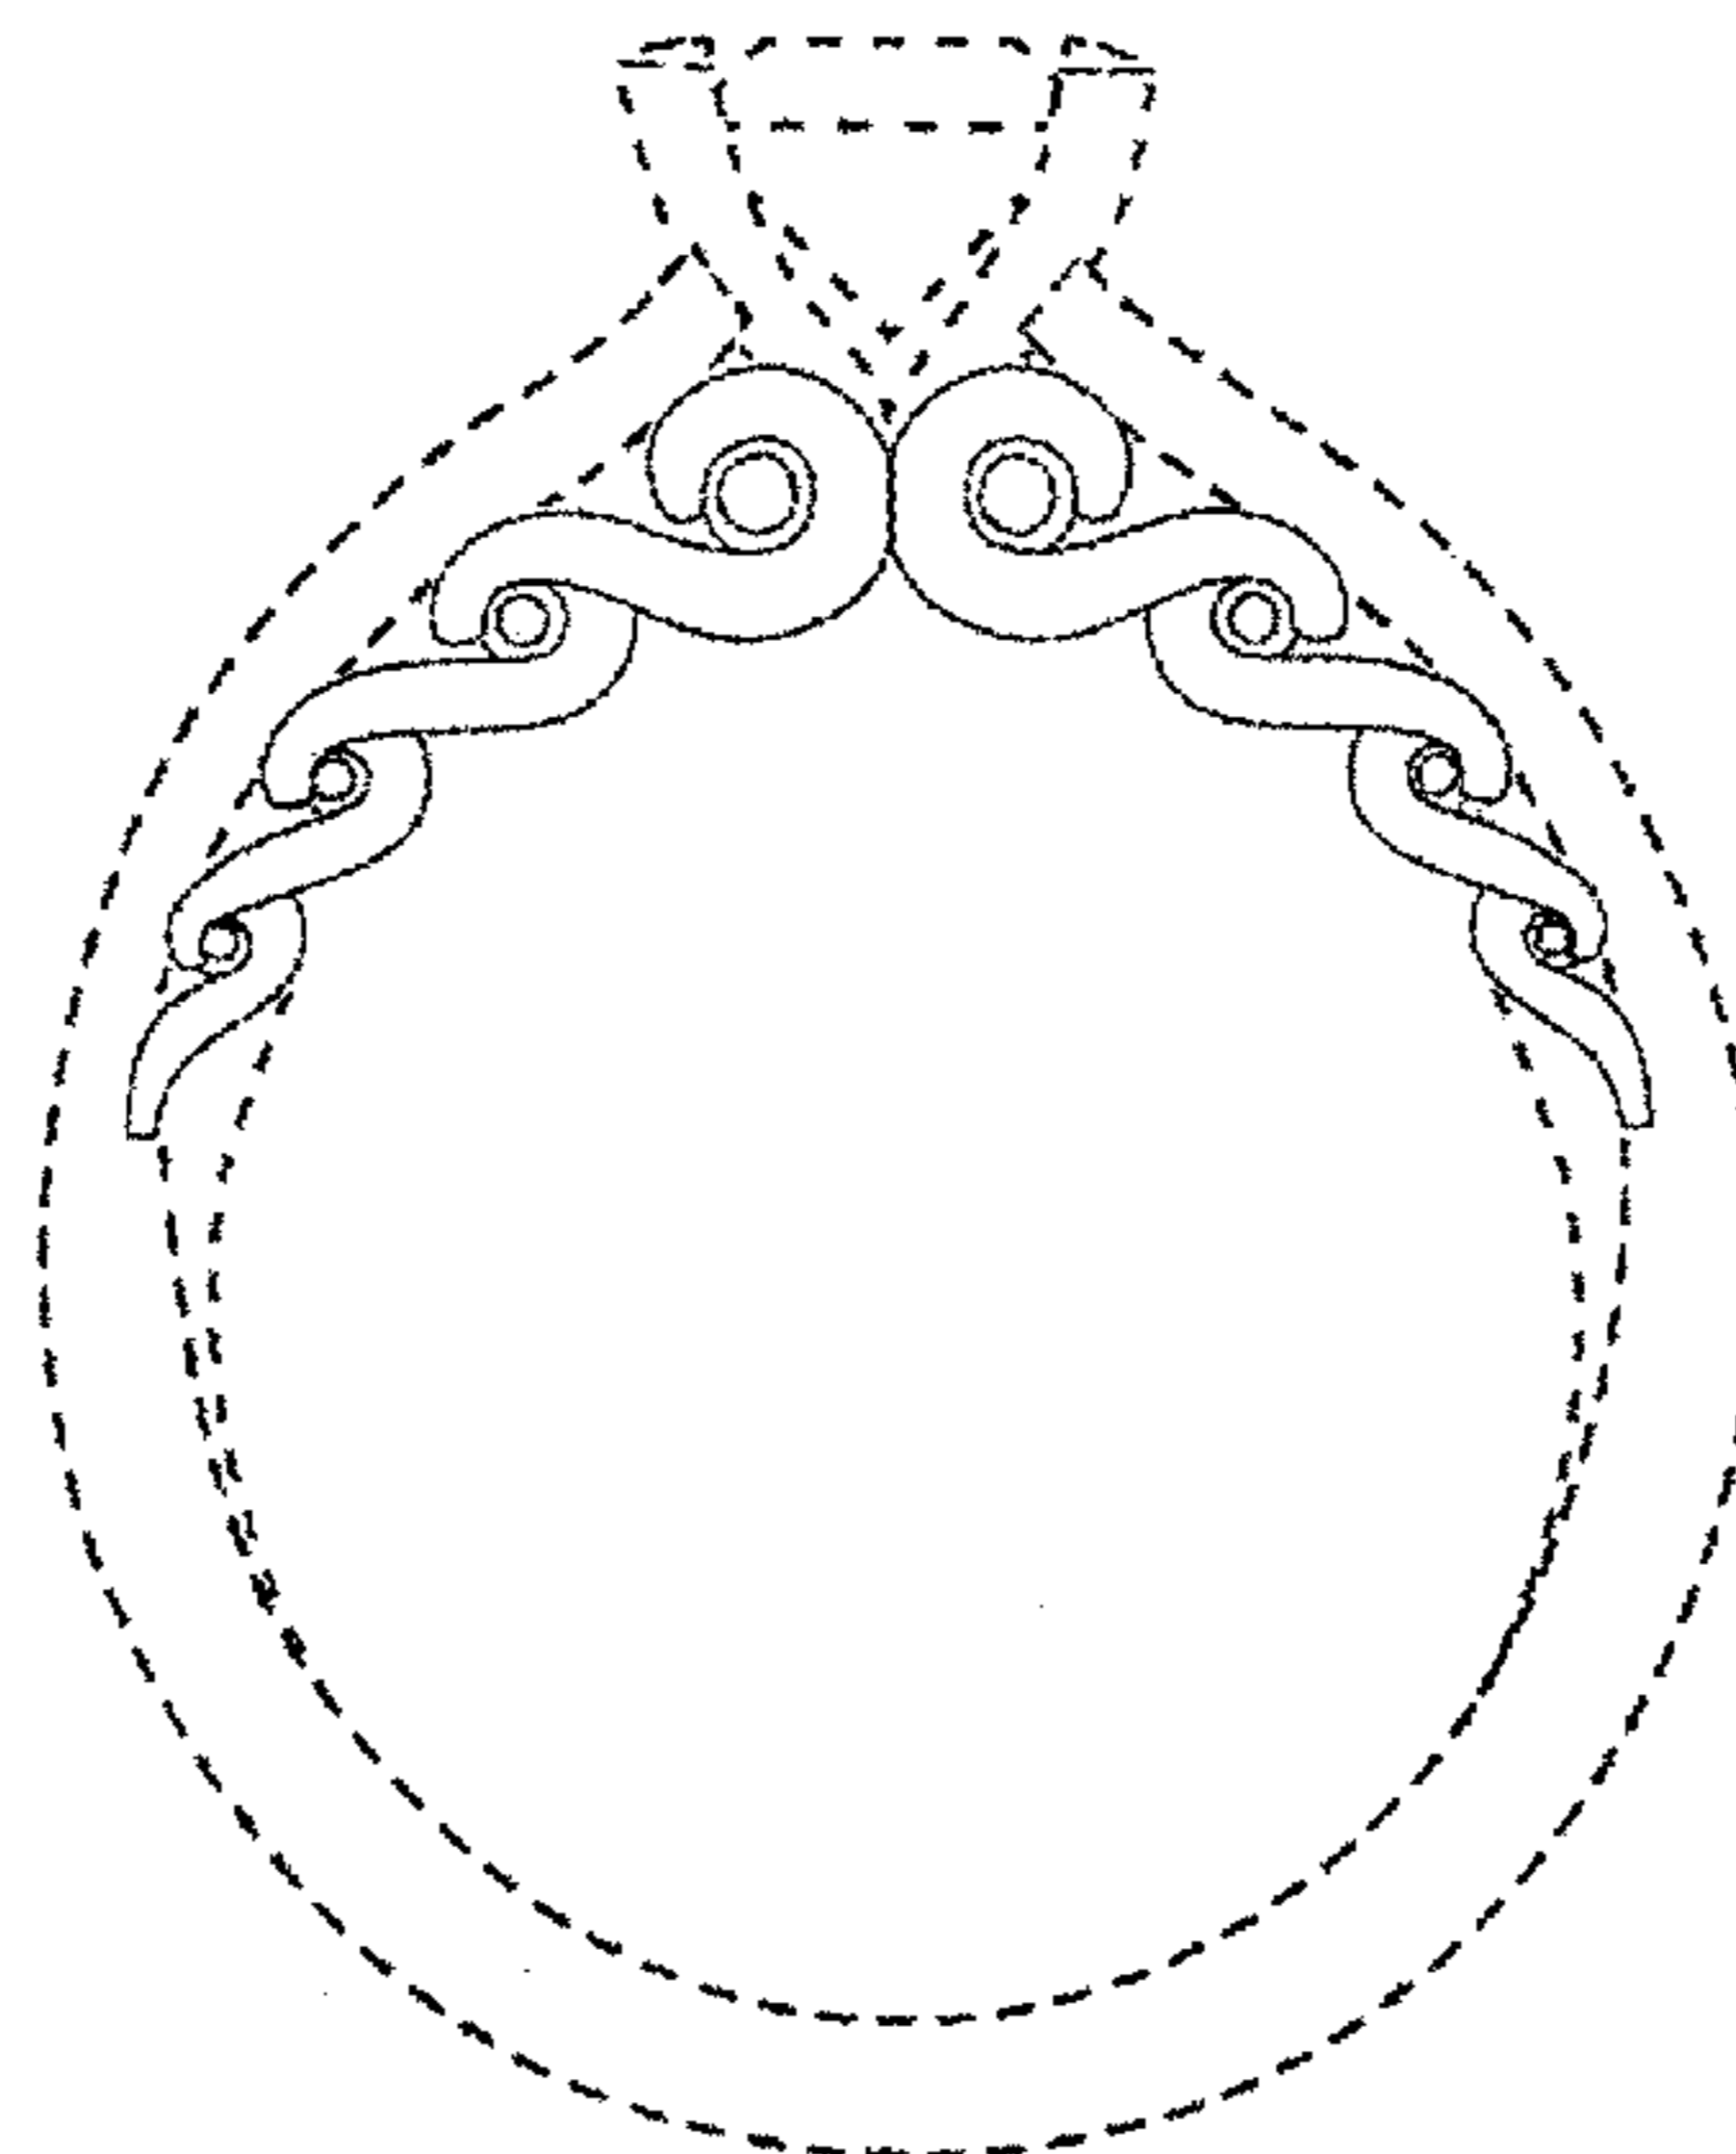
is a perspective view of a top side of the under gallery element for a ring.
